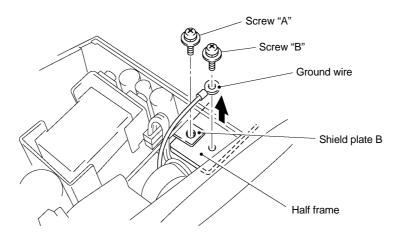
Removing the Screws Securing the Ground Wire
